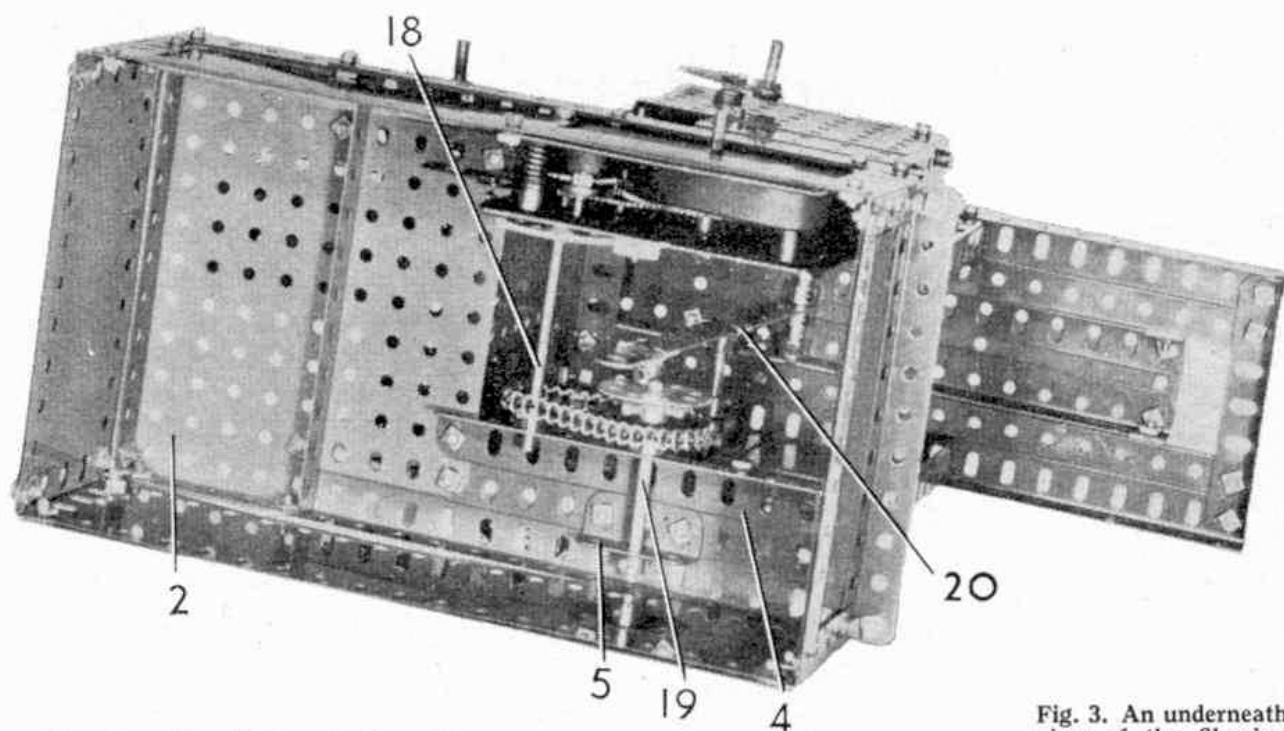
An underneath view of the Shaping Machine, showing how the Clockwork Motor is fitted.
